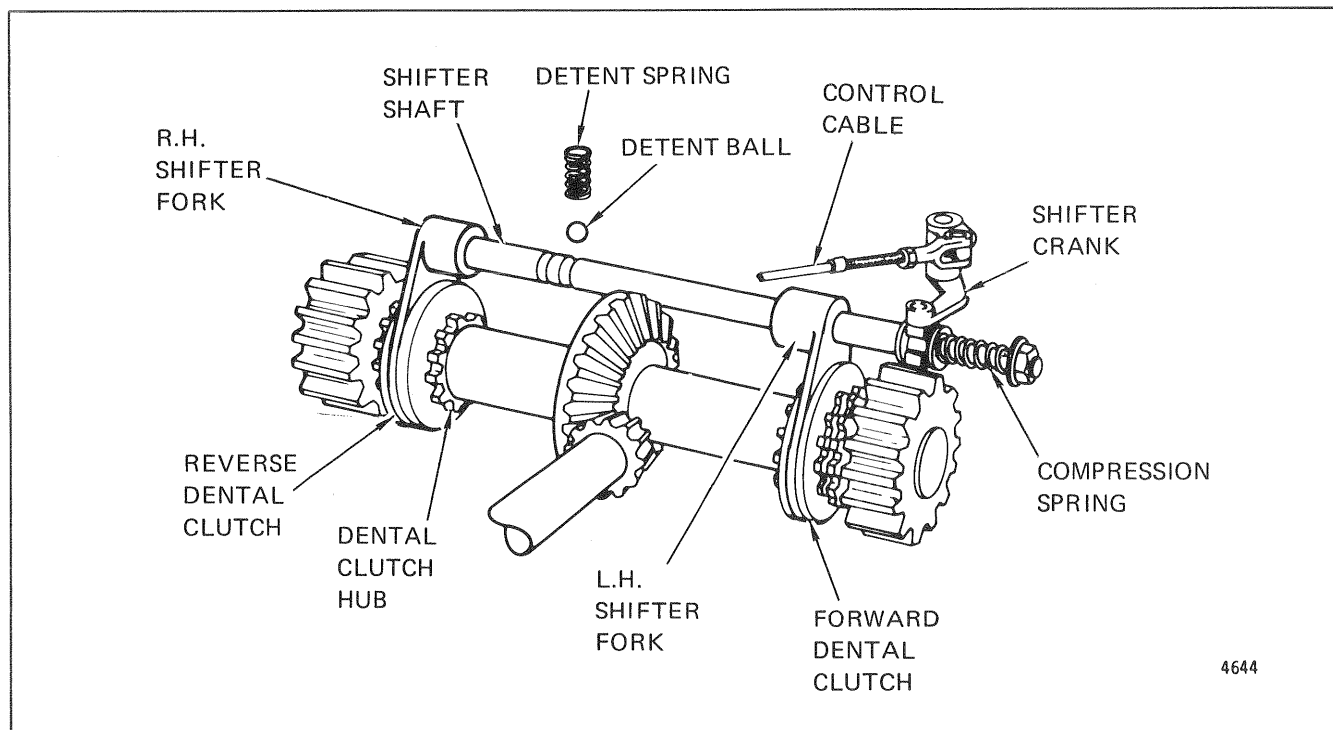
DIRECT DRIVE CLUTCH ASSEMBLY
